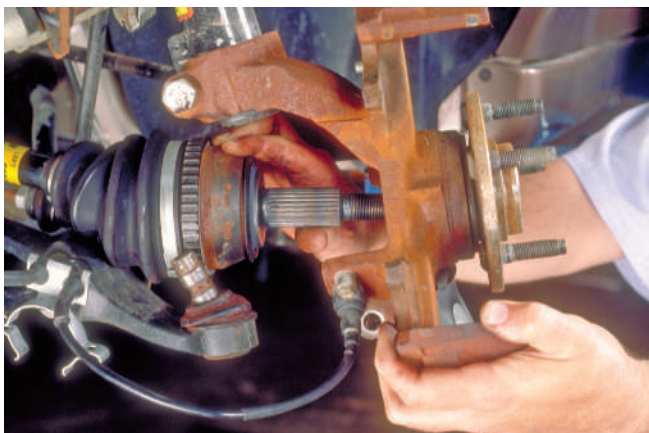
Pull the steering knuckle outward to allow the CV joint shaft to slide out of the hub.
